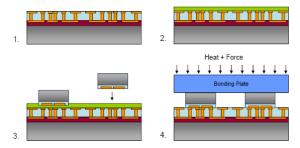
Step 3D-Assembly using photo-decomposable adhesive
